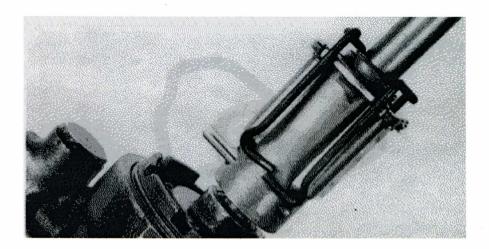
STEERING COUPLING CLAMP INSTALLATION
